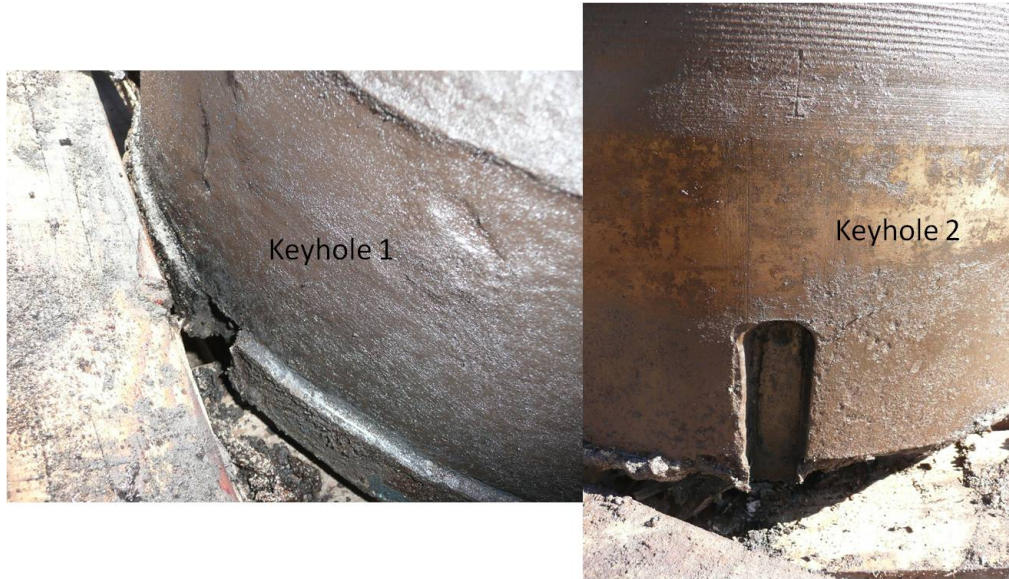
Keyholes of Pin Part II. A “4” detail is shown above Keyhole 2.
